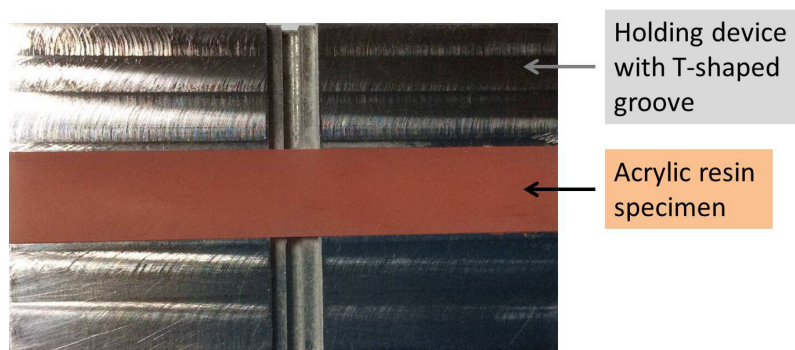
The acrylic resin specimen was inserted into the stainless steel holding device with T-shaped groove
